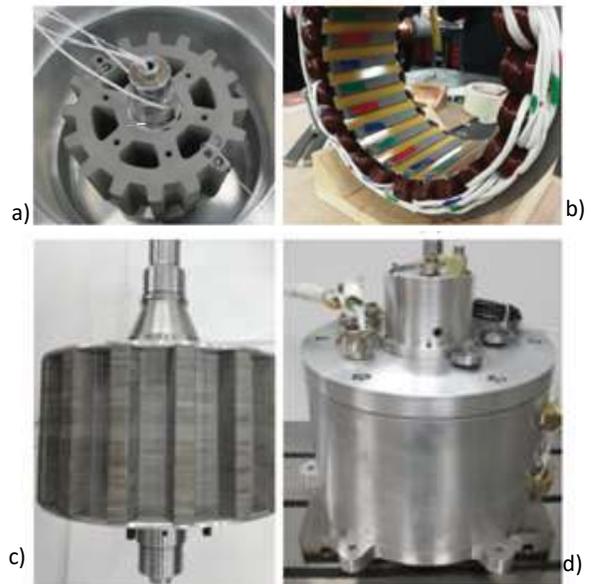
Prototype 24/16 SRM used as traction motor for HEV application: (a) rotor core, (b) stator-winding subassembly, (c) rotor-shaft subassembly, and (d) SRM assembly
